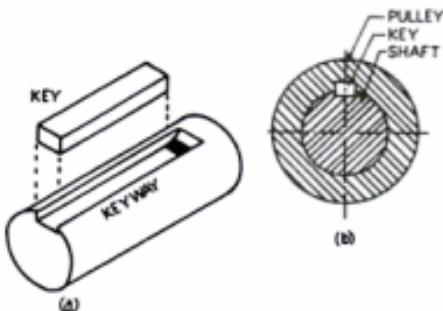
(a) An isometric view of a key and its keyway cut on a shaft; (b) The end view of a pulley mounted on a shaft
